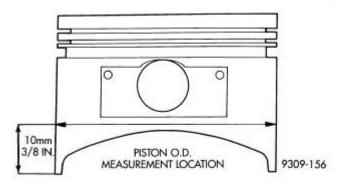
Piston Measurements Courtesy of CHRYSLER LLC
